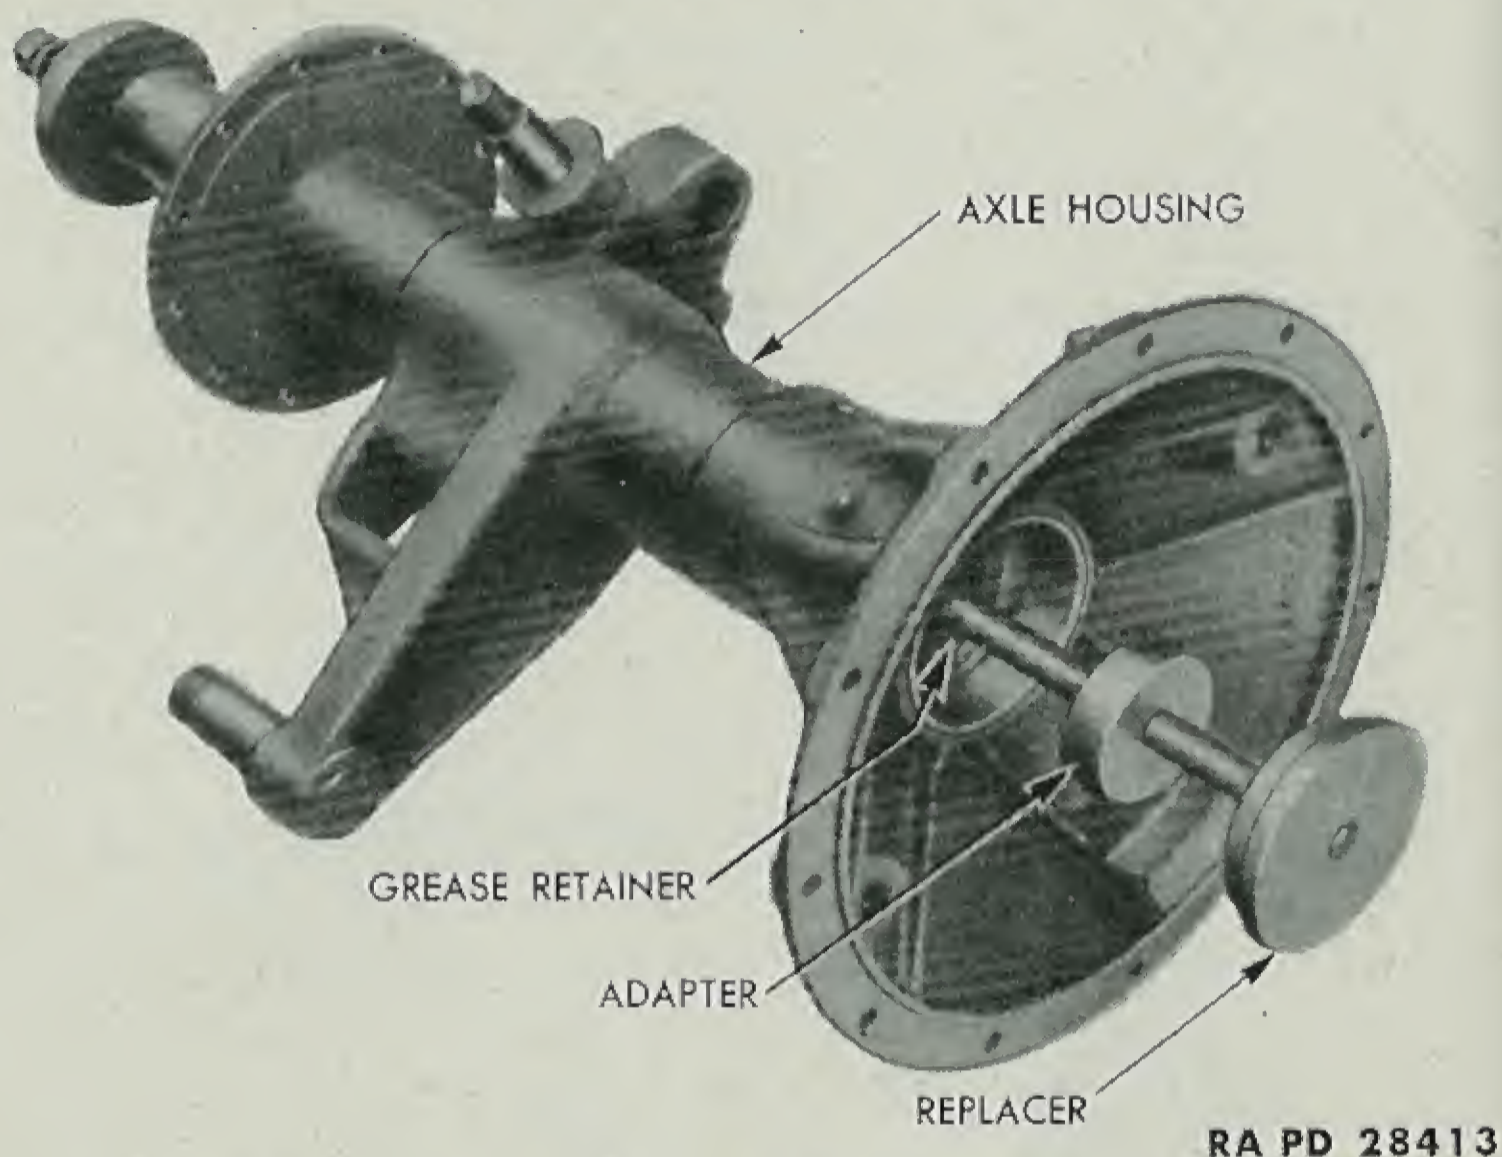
Installing Grease Retainer in Axle Housing with Replacer 41-R-2390-900 and Adapter M8-116
